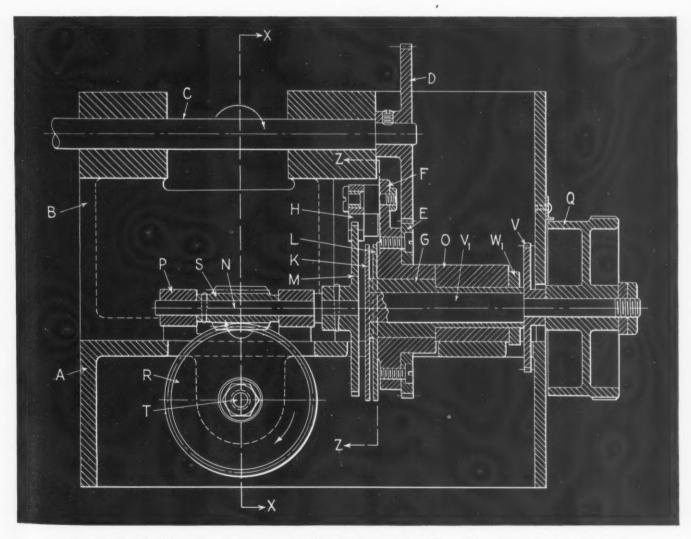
Section Y-Y of Fig. 1, Showing how the Feed-screw T is Turned by Worm-wheel R, Worm S, Shaft N, Ratchet Wheel M, Pawl H, Pawl-carrier F, Driven Gear E, Drive-gear D, and Drive-shaft C
